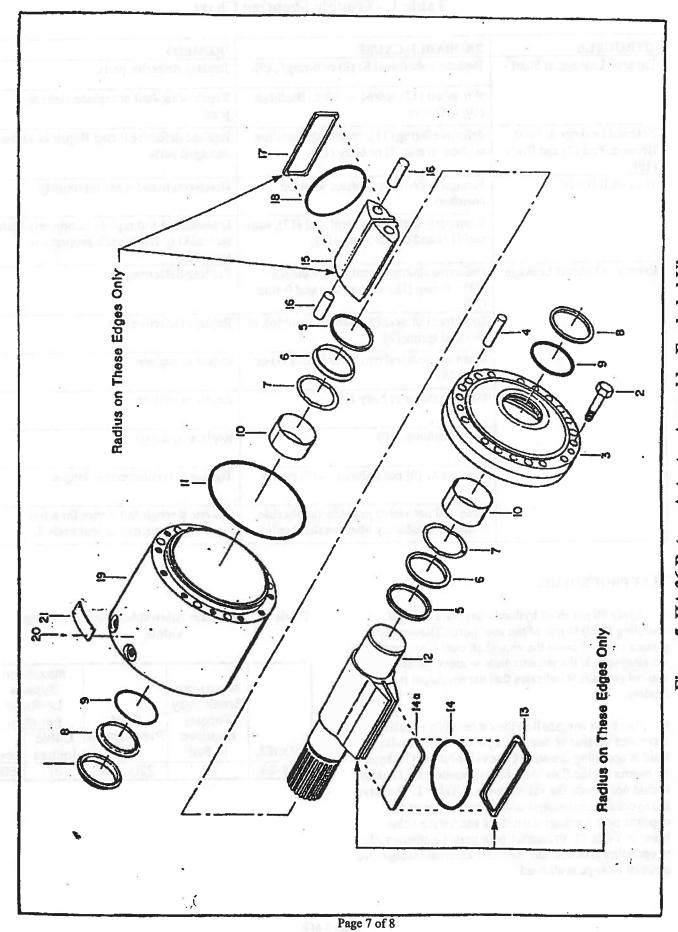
HA 36 Rotary Actuator Assembly, Exploded View
